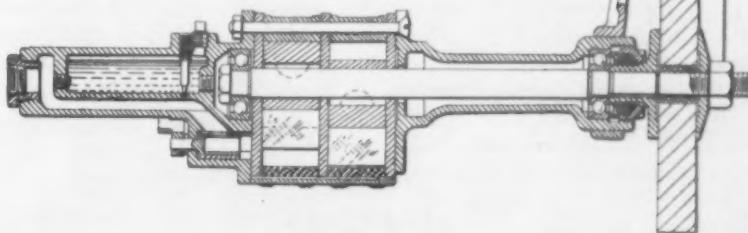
Shaft Assembly with Valve Blades. There are but three moving members to the motor
